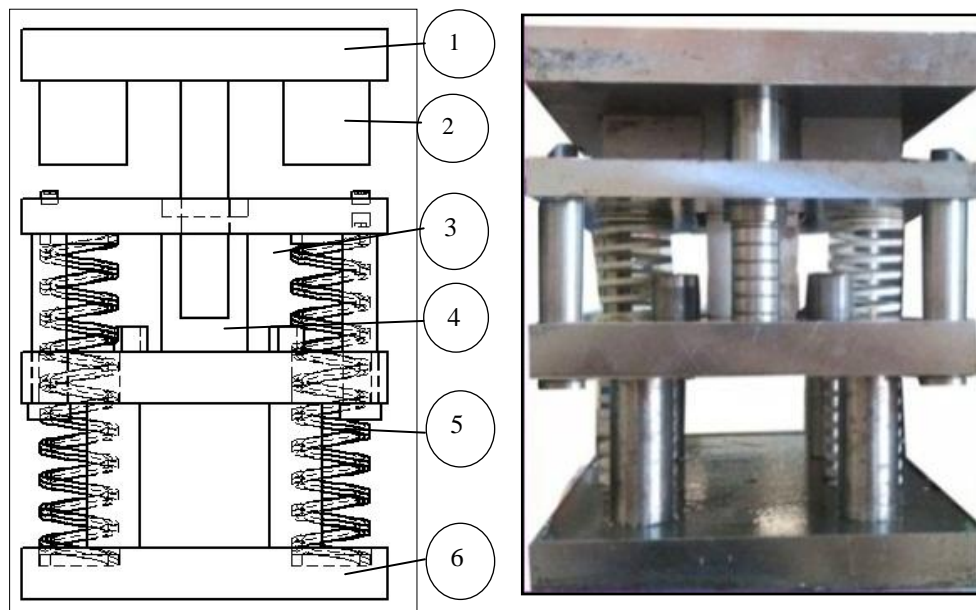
Schematic and photograph for the experimental set-up: (1) upper part, (2) die, (3) blank holder, (4) punch, (5) spring, (6) lower part.
